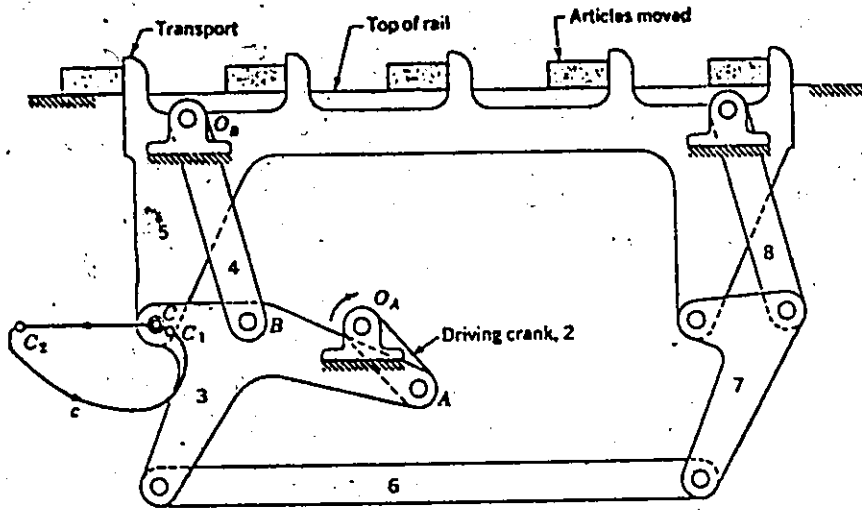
Transport mechanism. (From C. W. Haw, E. J. Crane, and W. L. Rogers, "Mechanics of Machinery," 4th ed., p. 439, McGraw-Hill Book Company, New York, 1958.) [1].
